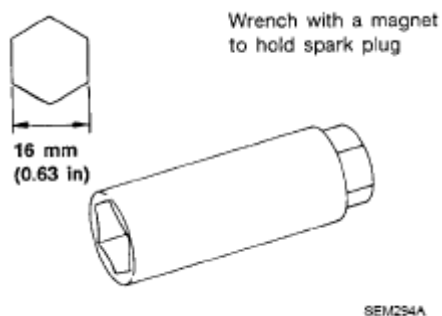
Identifying Spark Plug Wrench (Commercial Service Tool)
